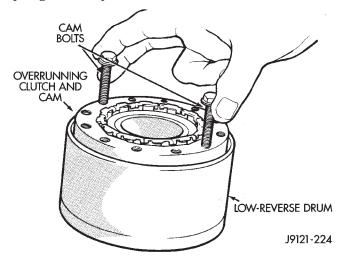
Removing Overrunning Clutch From Low-Reverse Drum
